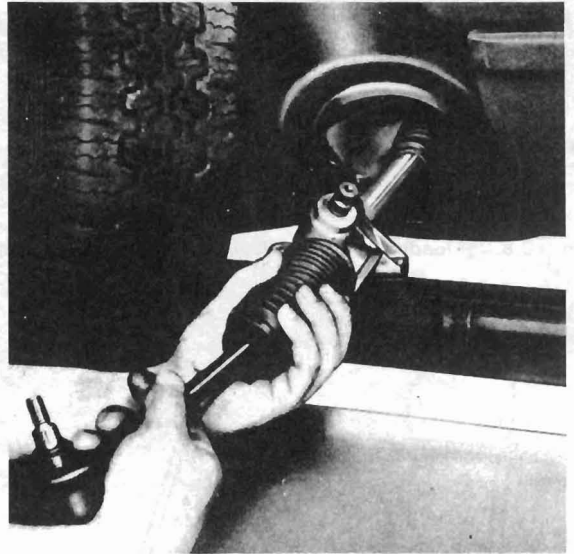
Withdrawing rack-and-pinion gear (Sec 16)
